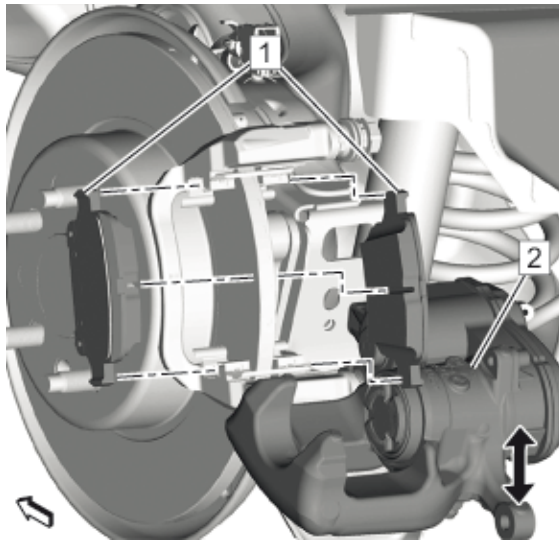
Rear Brake Caliper And Rear Disc Brake Pads
